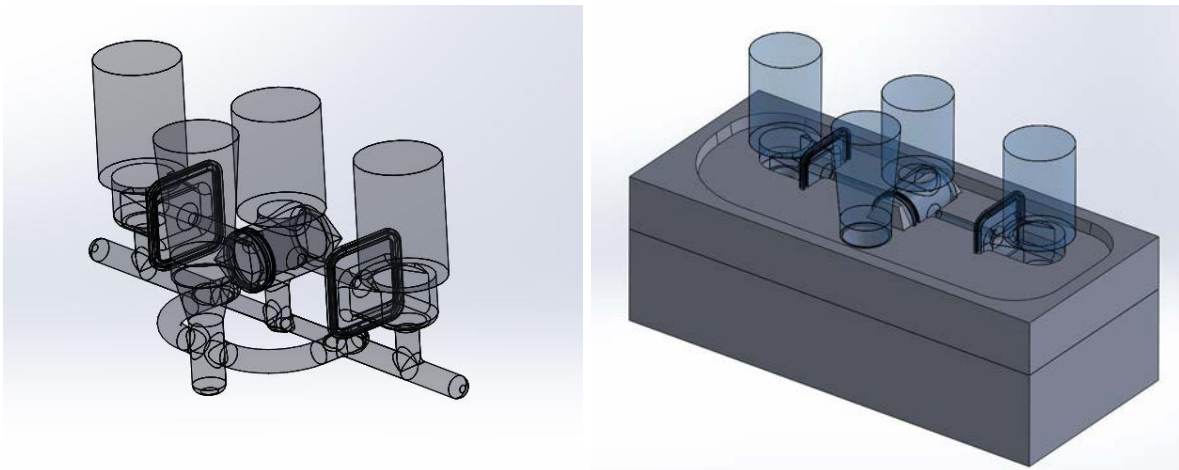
The riser/gating system for the steel core (left) and how it is set in the mold (right).
